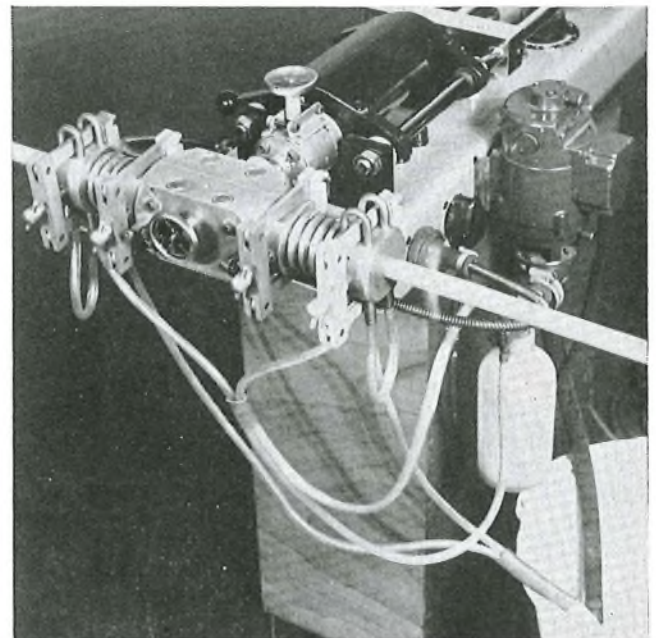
DOUBLE-INJECTION MOULD IN USE
